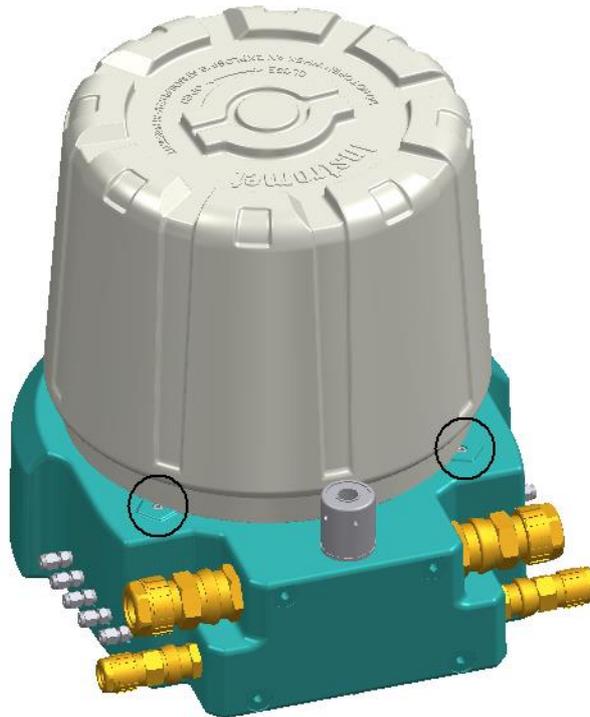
Location of security screws to fix the cap after mounting on the base
